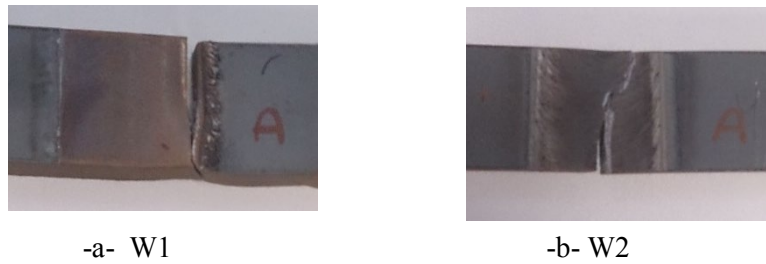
Fatigue test of a-high speed welding and b-low speed welding.
